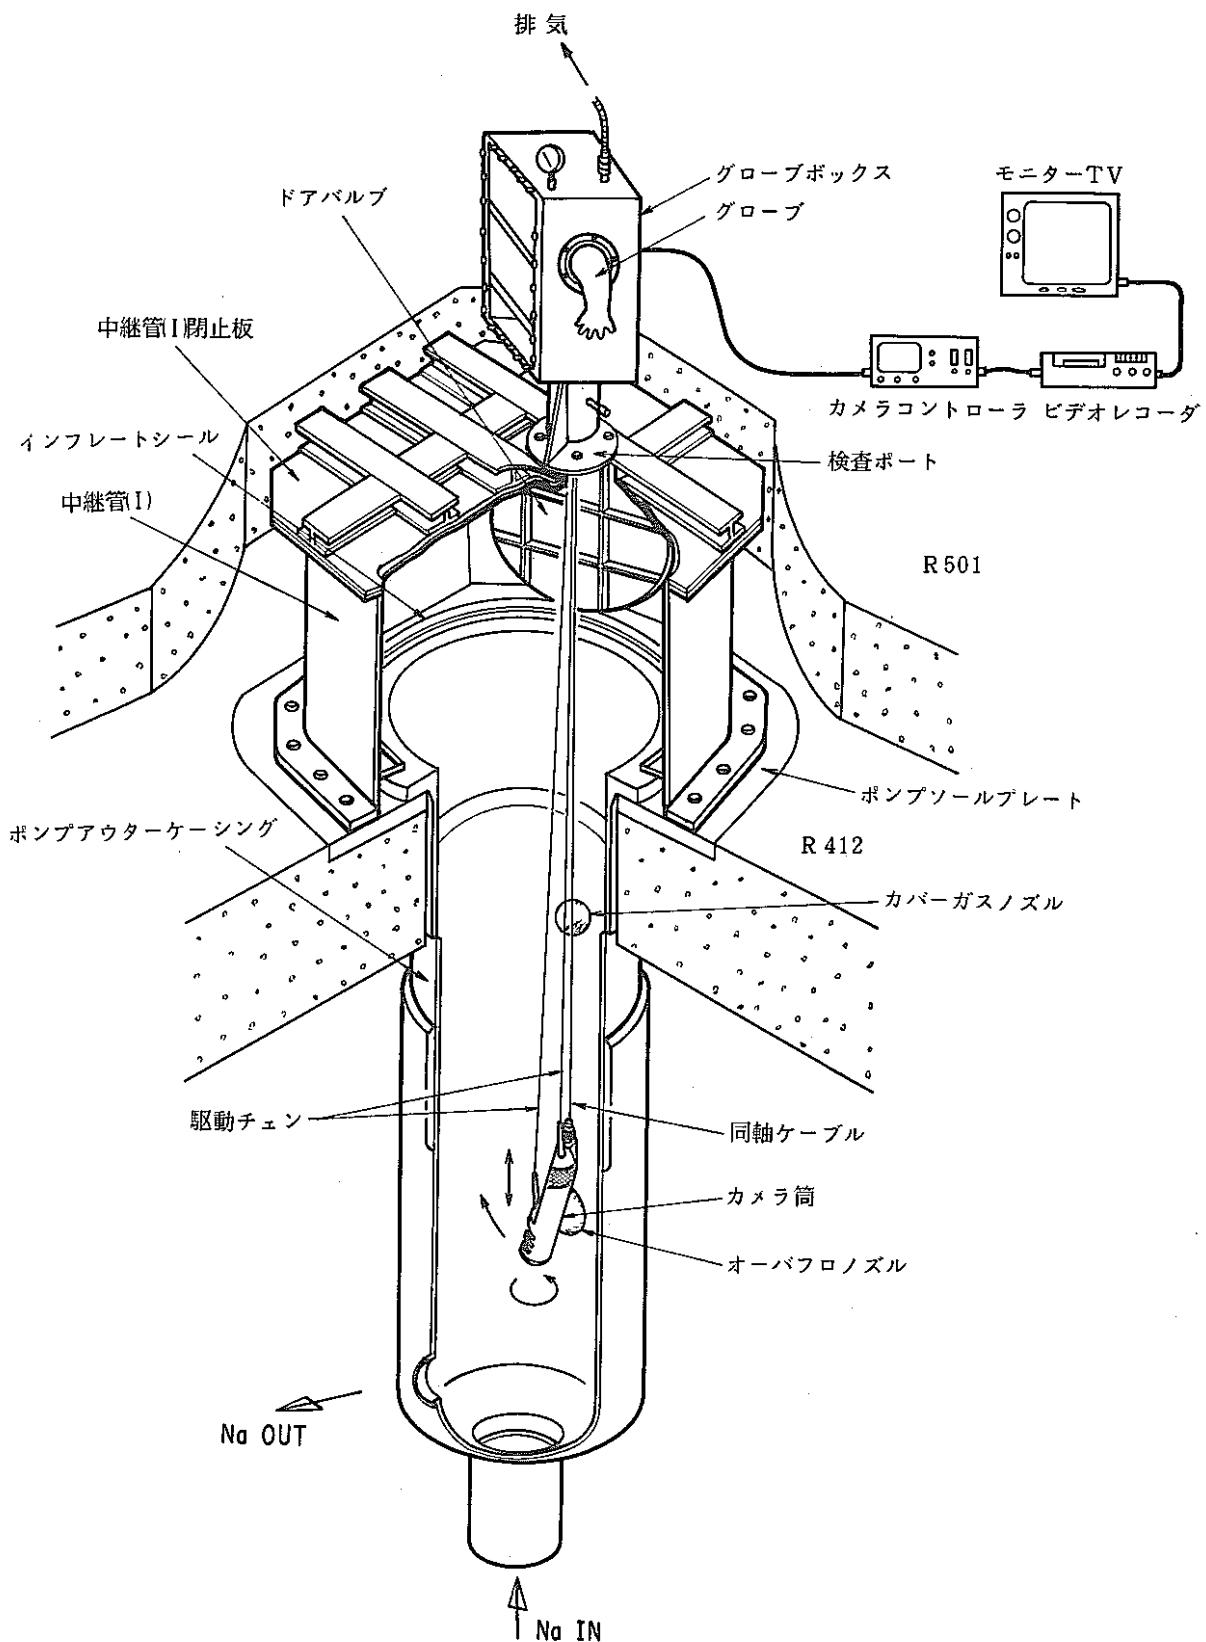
Visual Inspection of Inner Surface of Pump Casing Using MPI - ITV
